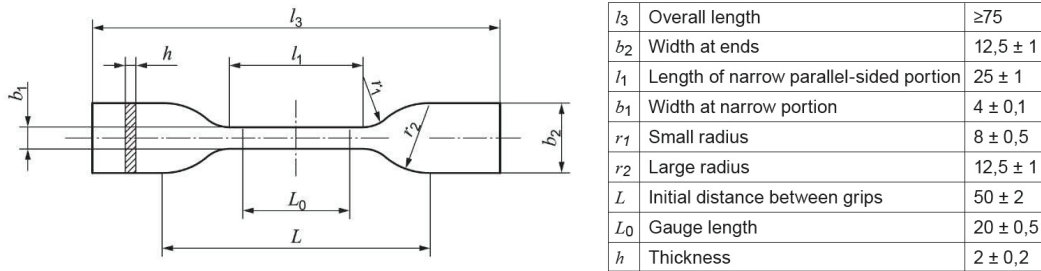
Type 5A test specimen dimensions according to the ISO-527 standard
